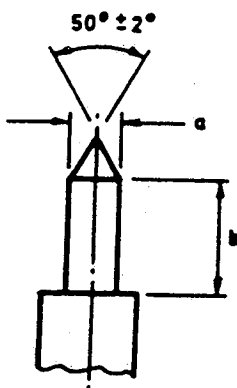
Gauge pin for centre contact of socket connector (for dimensions 'a' and 'b' see below)
